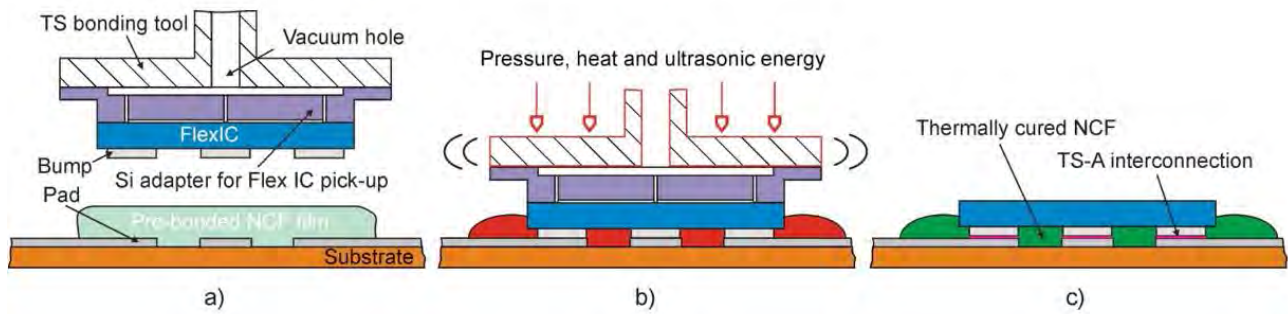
Thermosonic-adhesive packaging process combining NCA packaging and thermosonic bonding
